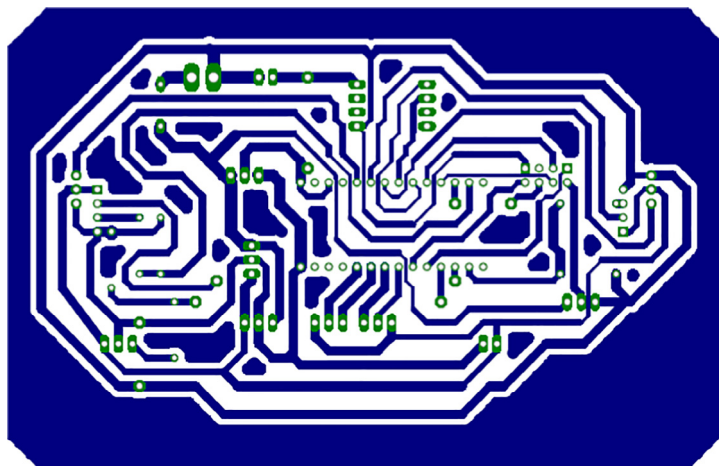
PCB Layout of the wheelchair prototype using EAGLE.
